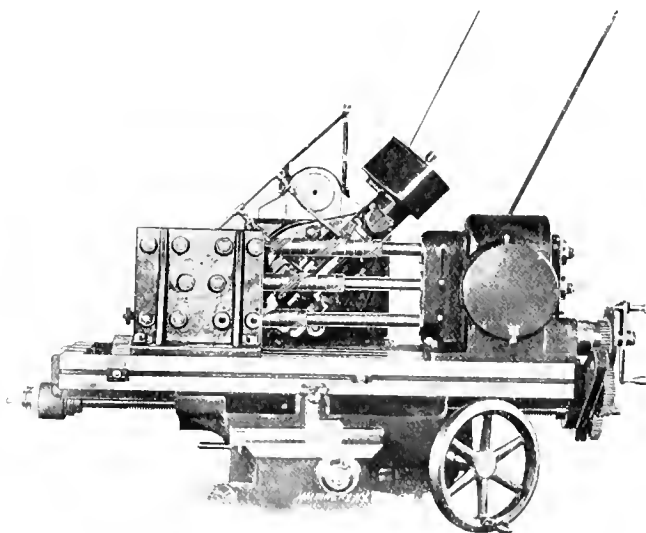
Adjustable Angular Cutter Spindle and Triple Spiral Head Attachments used on Milwaukee Plain Miller.
